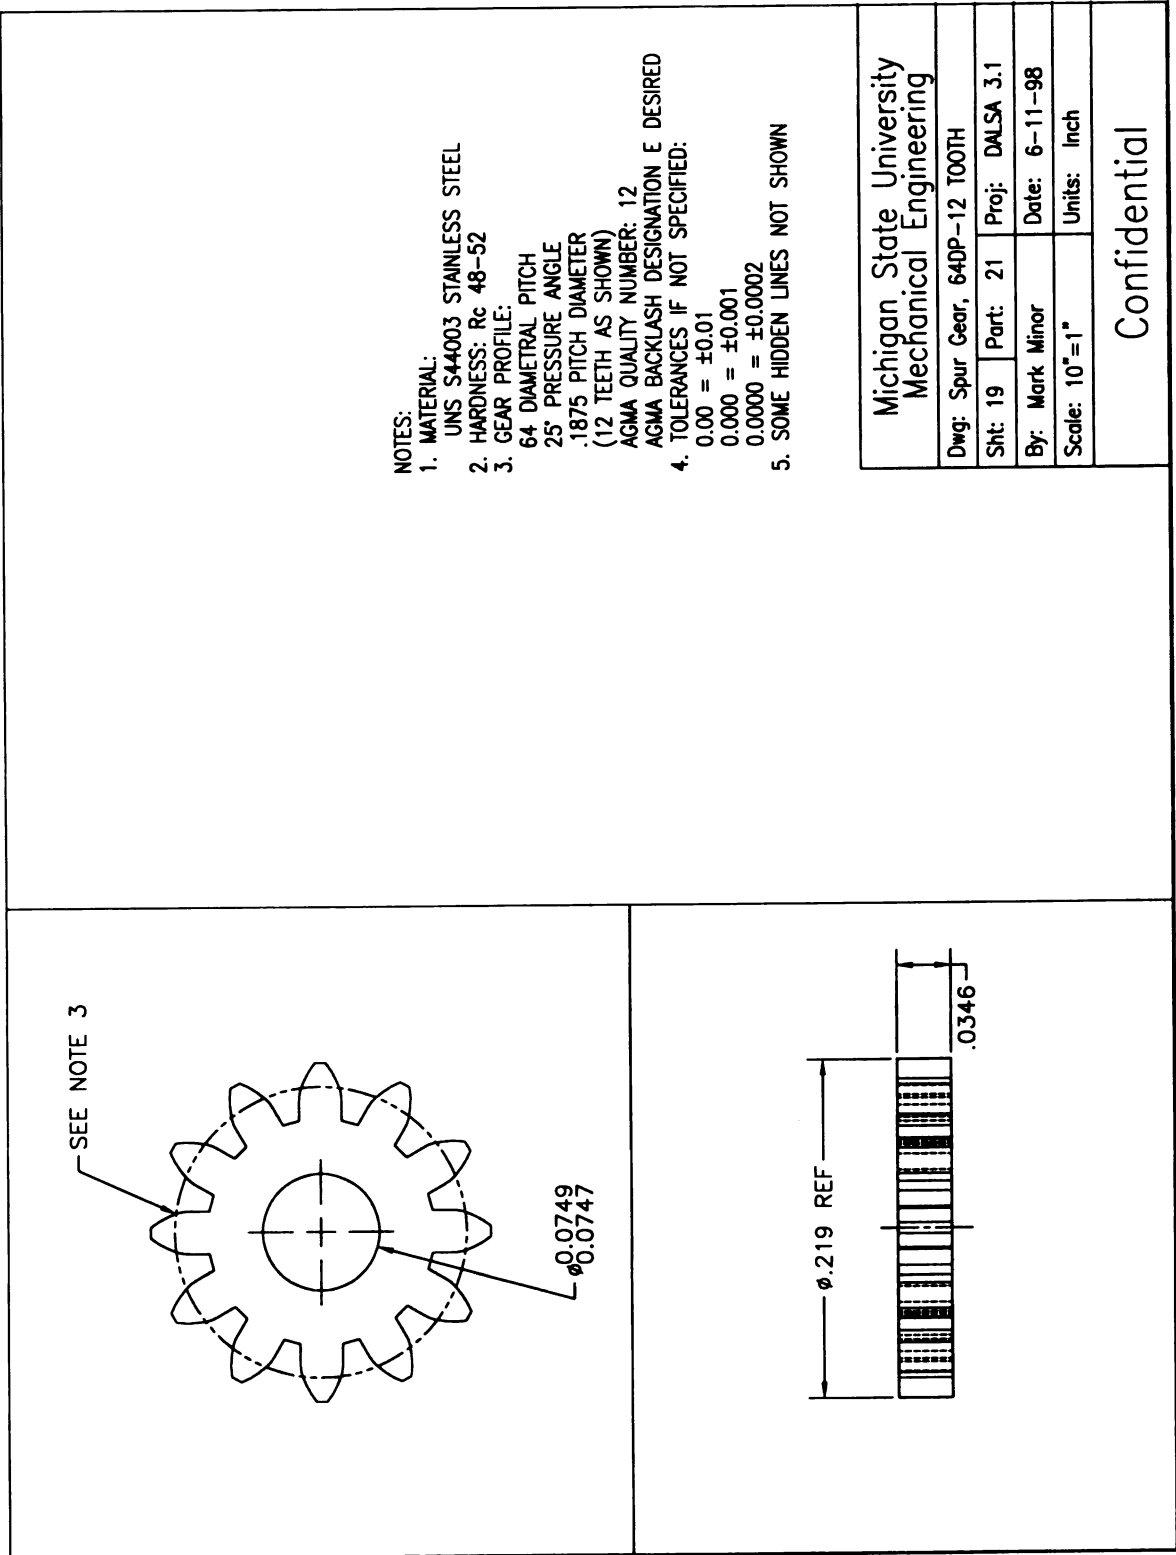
DALSA Component: Spur Gear 64DP, 12 Tooth (sheet 19).
